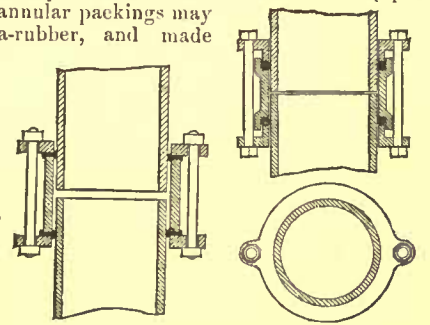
Fig. 174. Bolted-Ring Sleeve-Joint.
